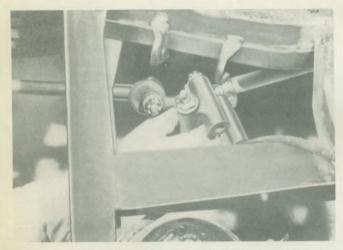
Adjusting positing of auxiliary bracket to align centre tie rod with drop arm
